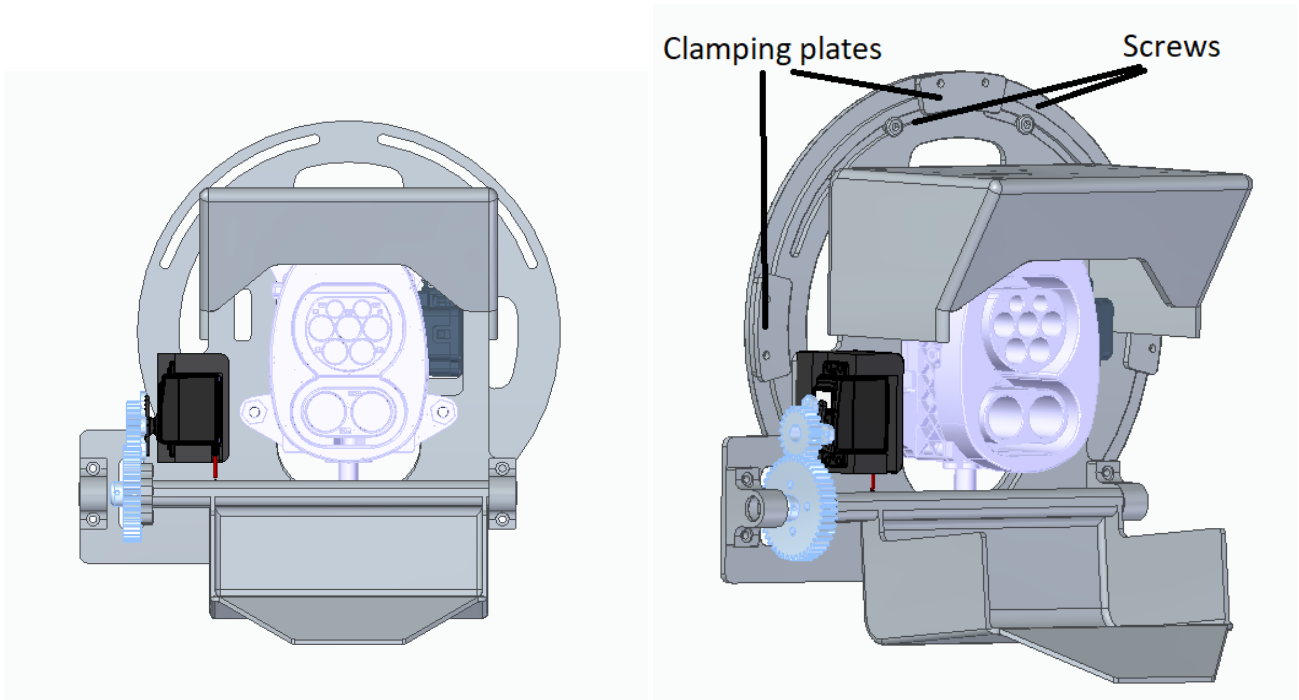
Left: A sub assembly of the carrier replica including the port and circular back plate etc. Right: A sub assembly showing the guide plates and screws used for clamping. Made in Solid Edge.
